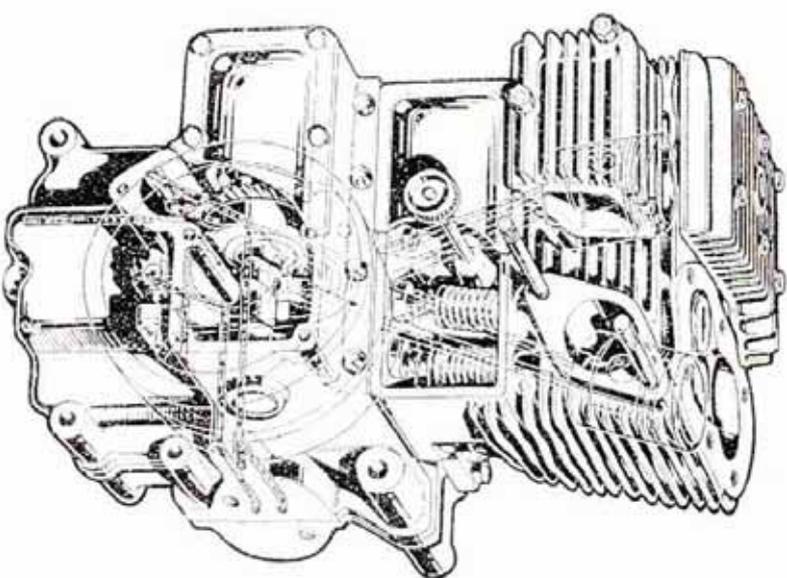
SECTIONAL VIEW OF "SILVER ARROW" ENGINE SHOWING OIL PASSAGES
